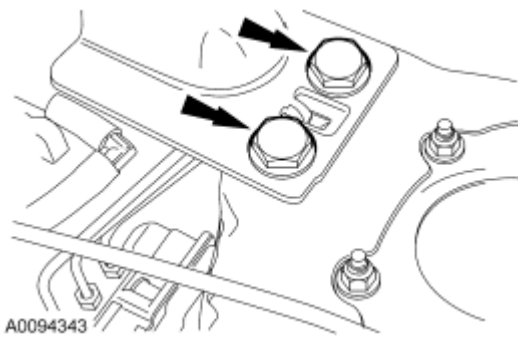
Identifying Transaxle Roll Restrictor Bar Bolts
